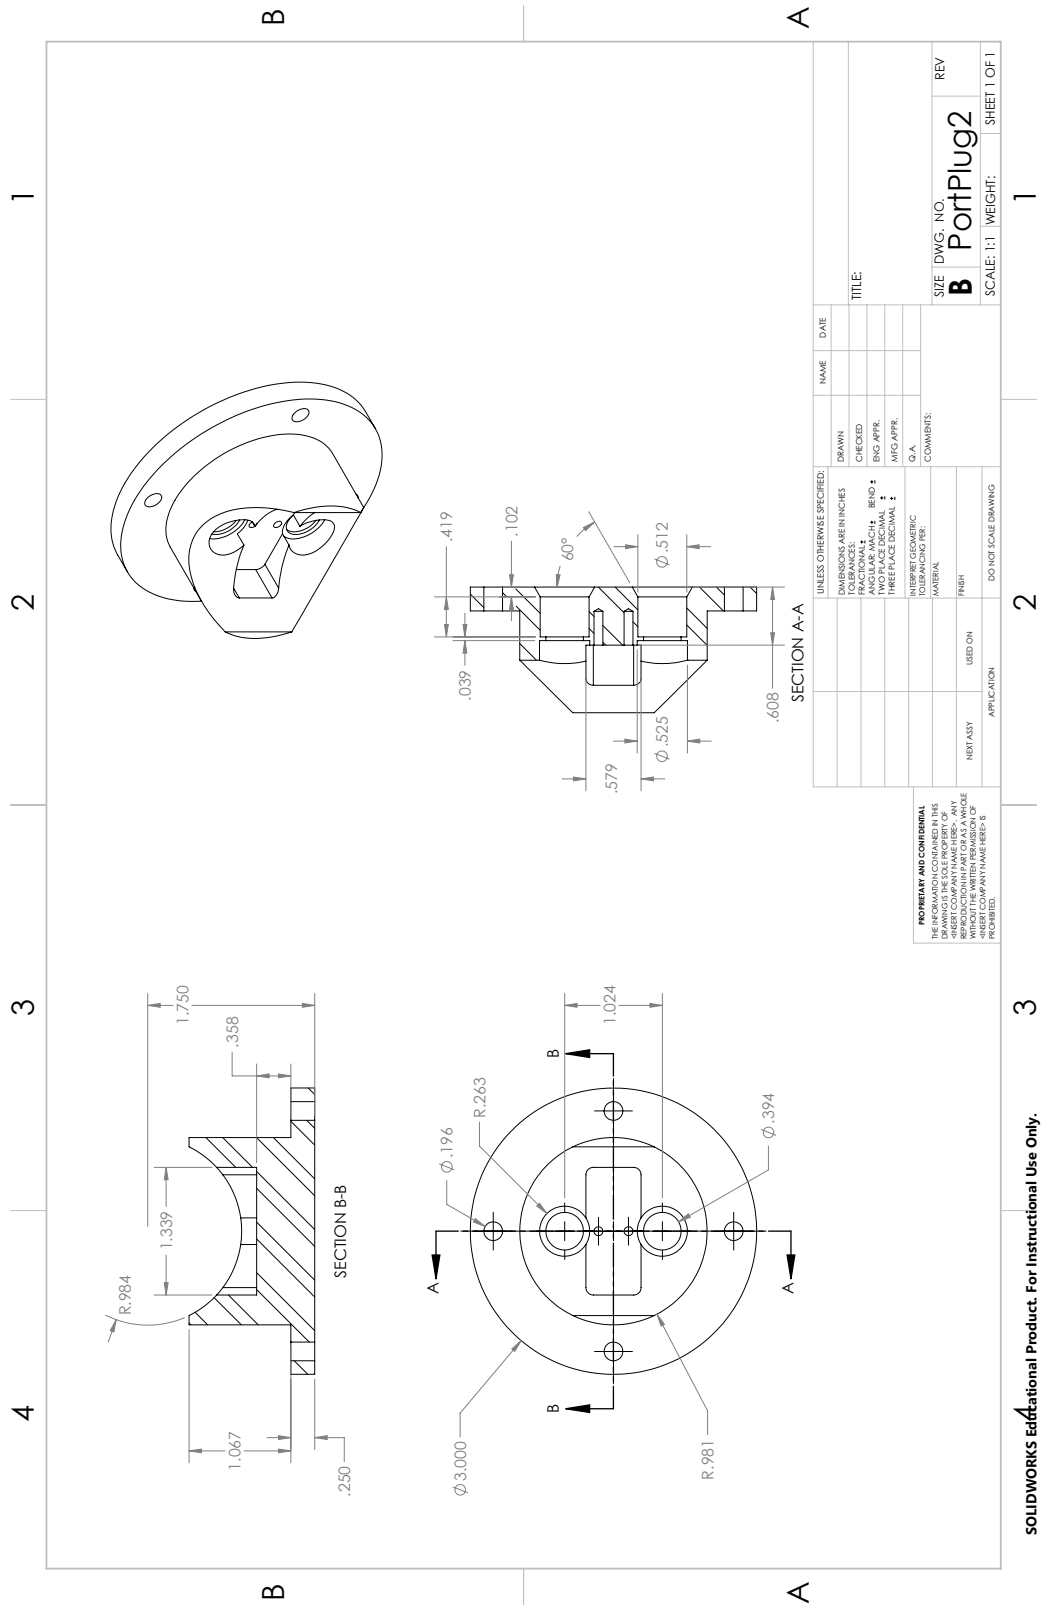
Drawings for the second of two port plugs of the custom exhaust sensor module.
